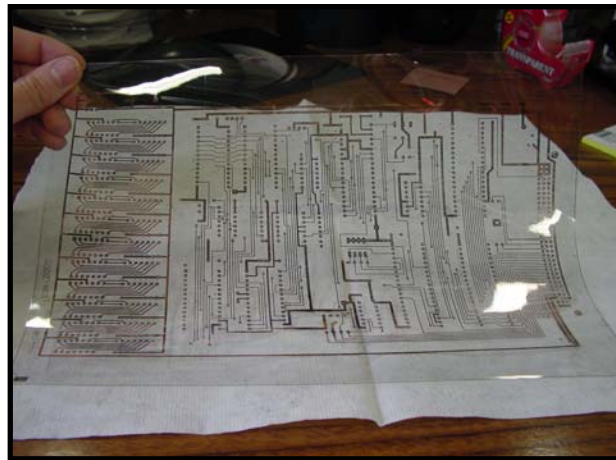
Flexible circuit boards manufactured using laser printing method.
